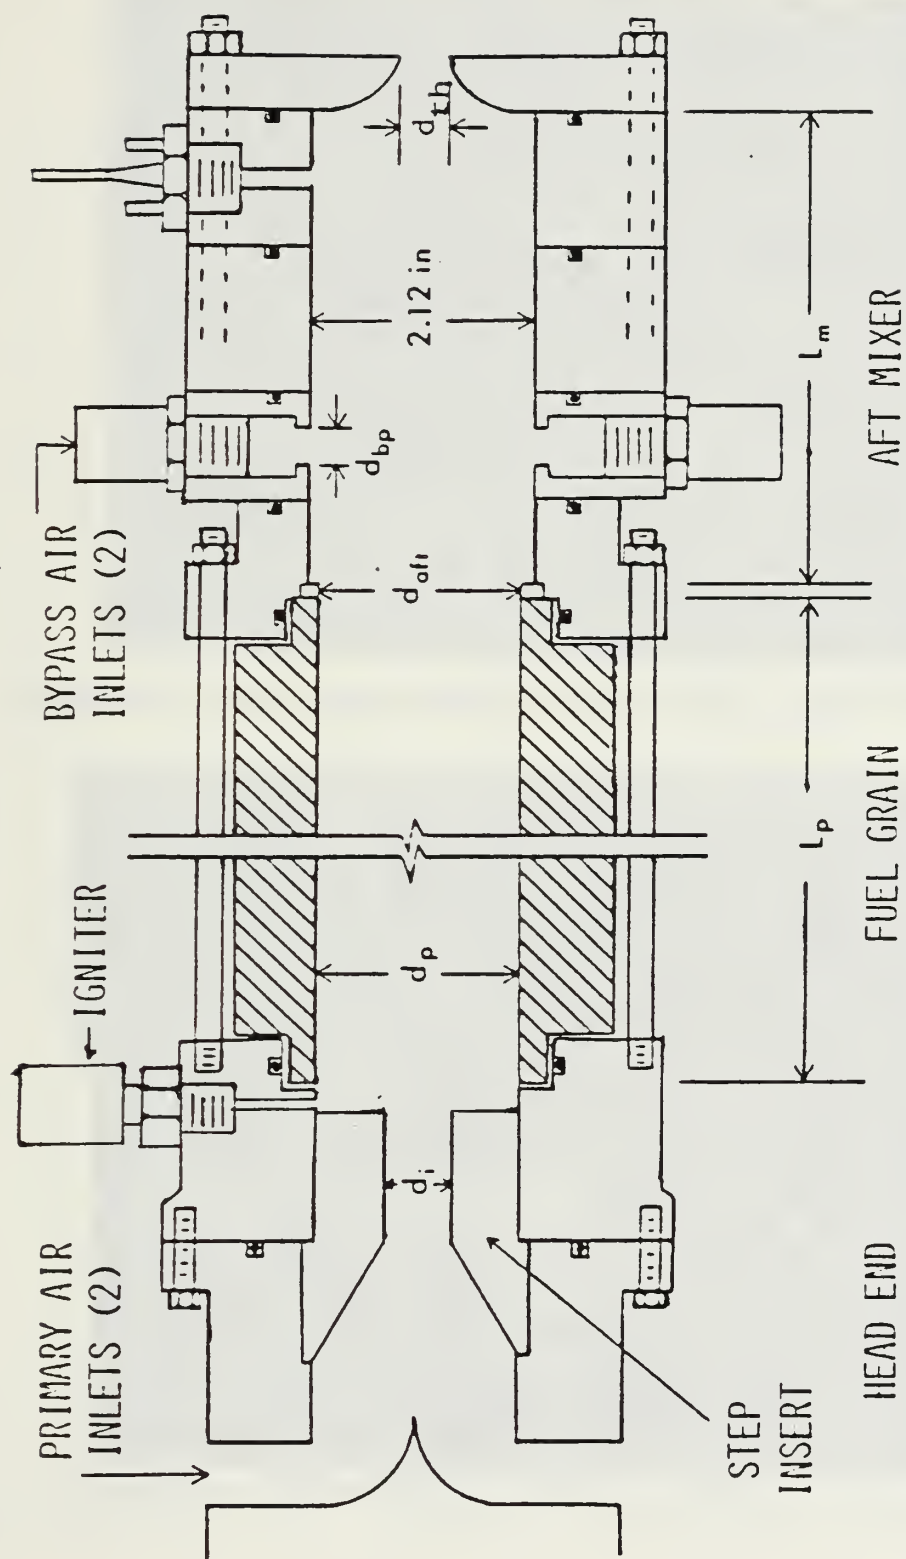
Schematic of Solid Fuel Ramjet Assembly.
